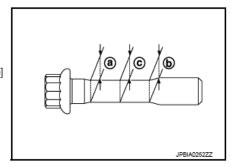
Identifying Positions Of Measuring Connecting Rod Outer Diameters Courtesy of NISSAN MOTOR CO., U.S.A.
